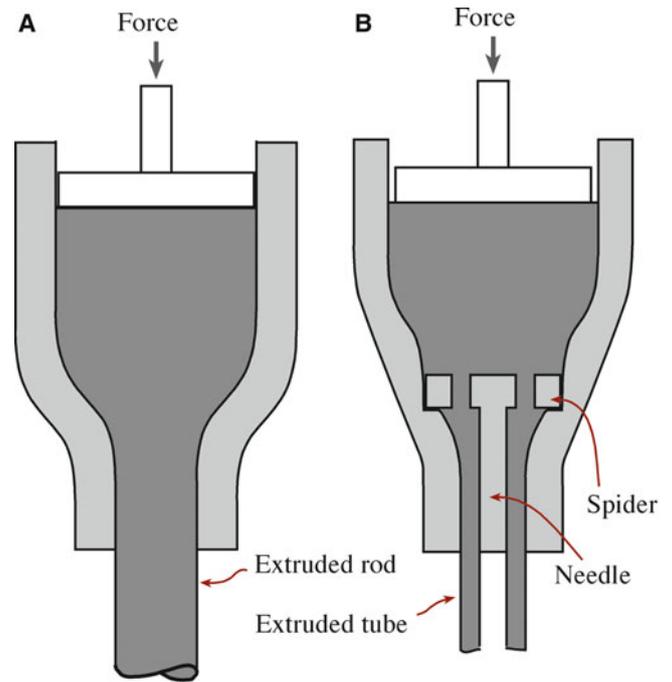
Extrusion of (A) a rod and (B) a tube.
